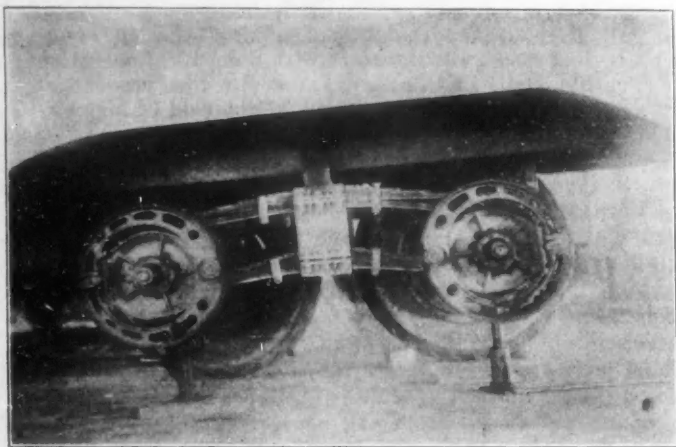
A SPRING SUSPENSION CONSISTING OF TWO SPRINGS BOUND TOGETHER AND PIVOTED TO THE CHASSIS FRAME
